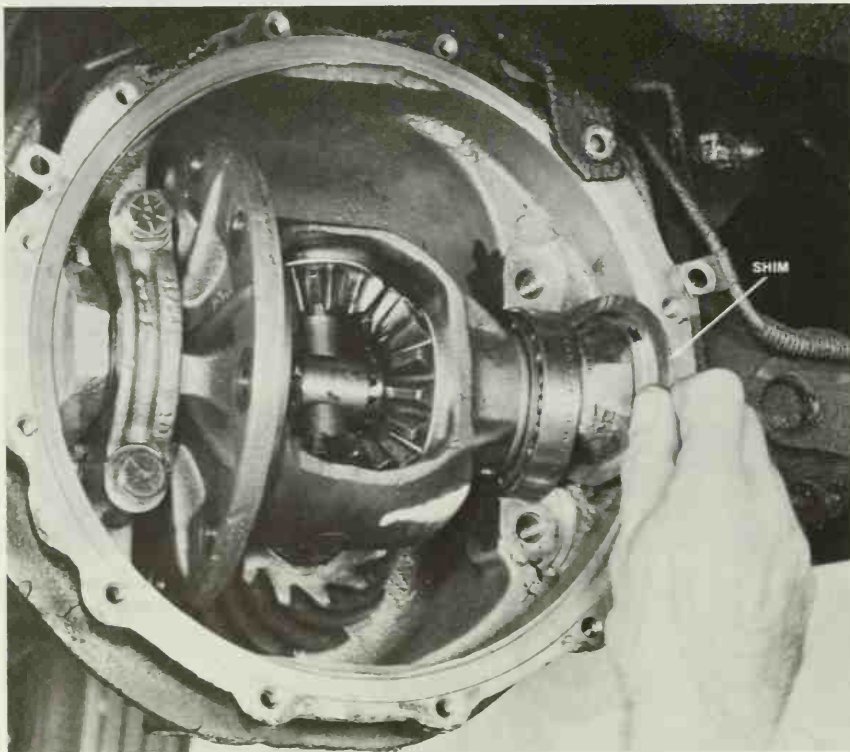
Shims are used on a unitized carrier to control bearing end play. (American Motors Corporation)
